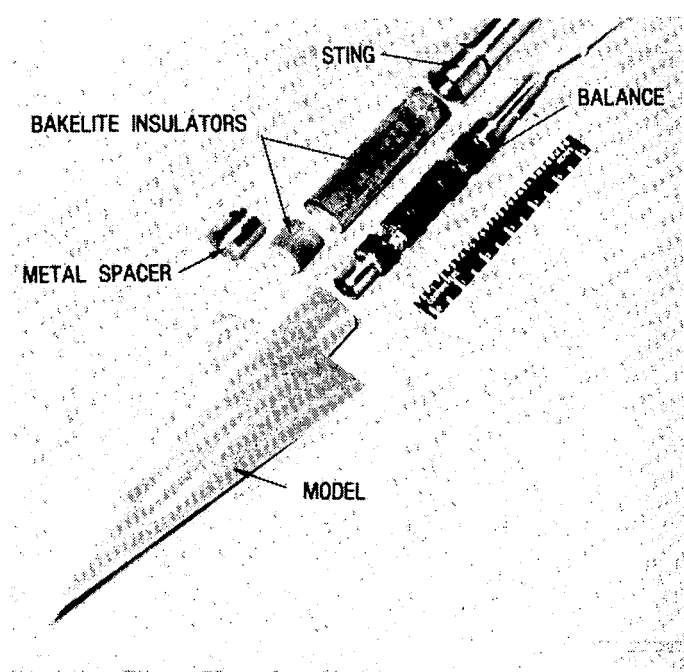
Machined steel model used in tests of advanced strain-gage balance.
